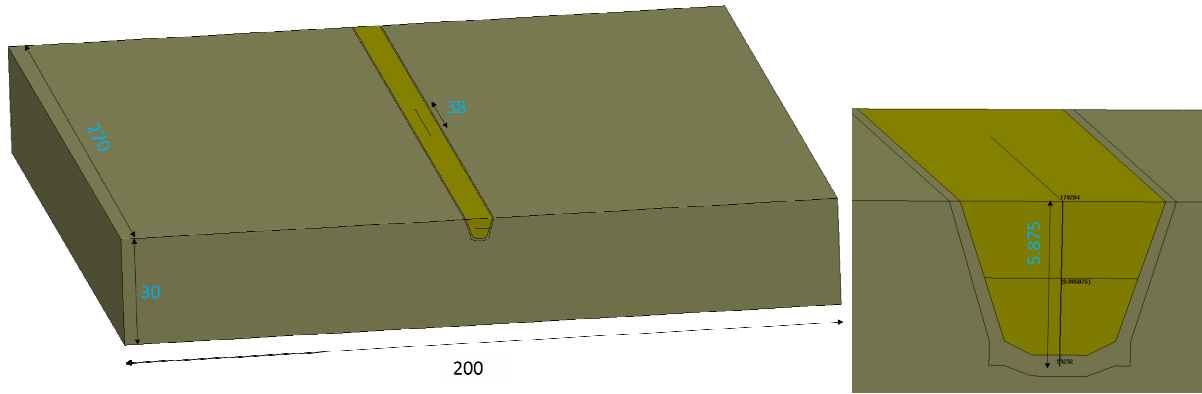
The geometry of version 1, with virgin material. The yield strength of the base material (brown) is 275 MPa, and the yield strength of the weld material (yellow) is 323 MPa. The right image shows a cut view through the crack, showing the crack depth
